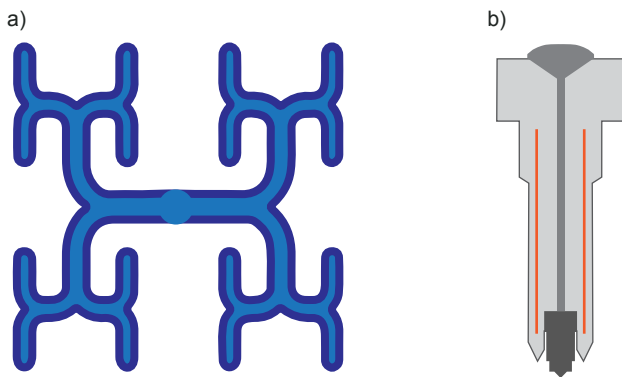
(a) low shear hotrunner system without dead spots of a 16 cavity manifold; (b) externally heated open nozzle
